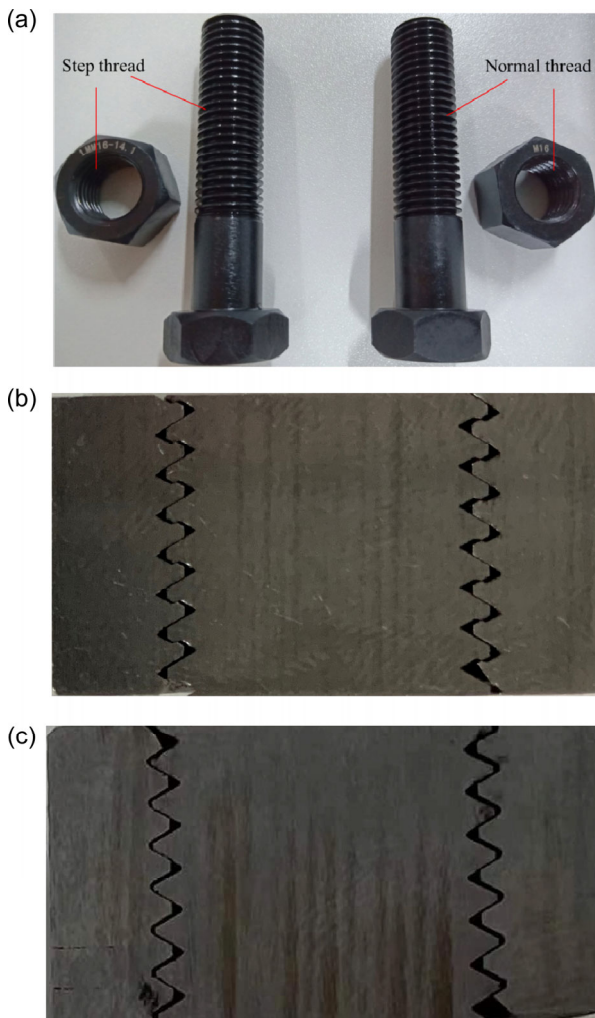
Manufactured novel and regular bolted joints, and section profiles of the engagement threads: (a) novel and regular bolted joint; (b) section profile of step external and internal threads; (c) section profile of the normal external and internal threads.
